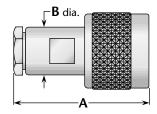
(Solder-clamp; gold-plated ferrule, nickel-plated body)
